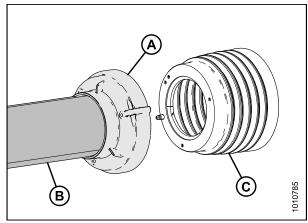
Base Cone and Shield Tube Removed from Outer Cone
